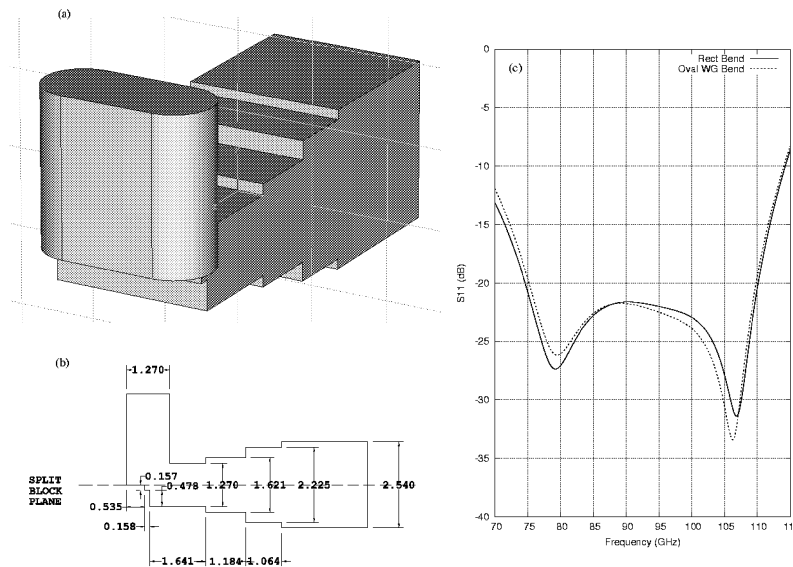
Square to rectangular transformer and E-plane Bend Across Split-block plane. (a) Isometric view of the transformer and E-plane bend; (b) Cutout view with dimensions. All dimensions are in mm; (c) Input match for the transformer and E-plane bend. The two curves show the change in the match from using rectangular and oval waveguides in the top half of the split plane.
